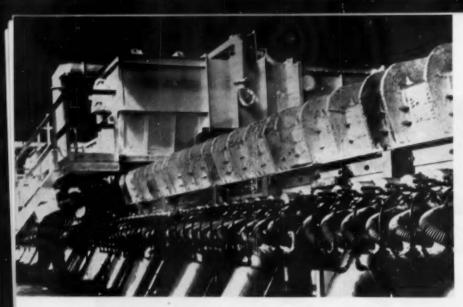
Side View of High-Speed Heating Furnace for Skelp Shows an Almost Continuous Series of Burners
